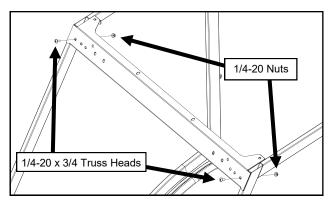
(Windshield Support to Side Frame Fasteners)
